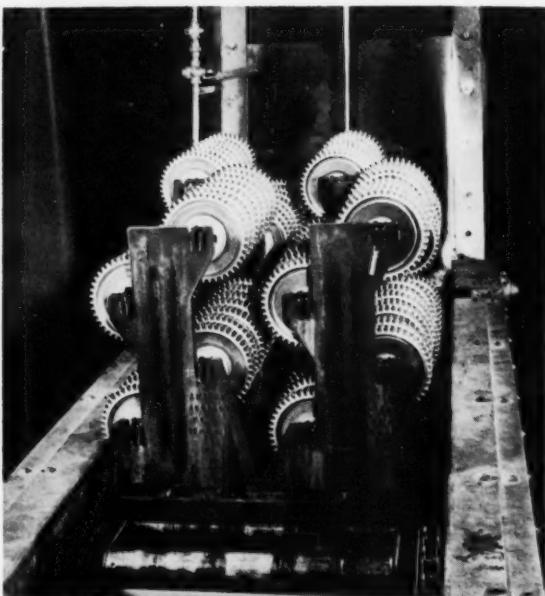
Cast tray and fixtures loaded with steel gears. Note test bar suspended to upper right of charge.
